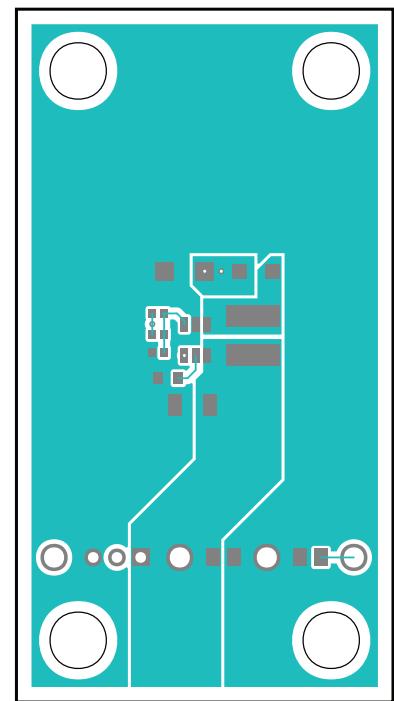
EVAL-ADPL21610-AZ PCB Layout—Top View
